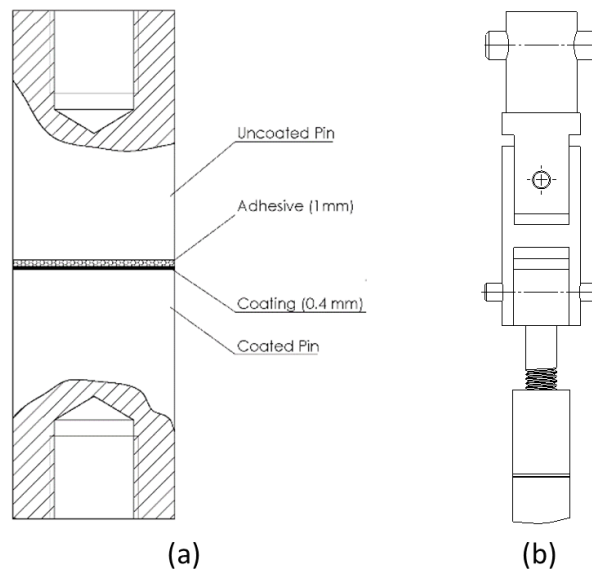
Sample for adhesion tests: (a) sample geometry and (b) upper part of the self-aligning loading tool (symmetric)
